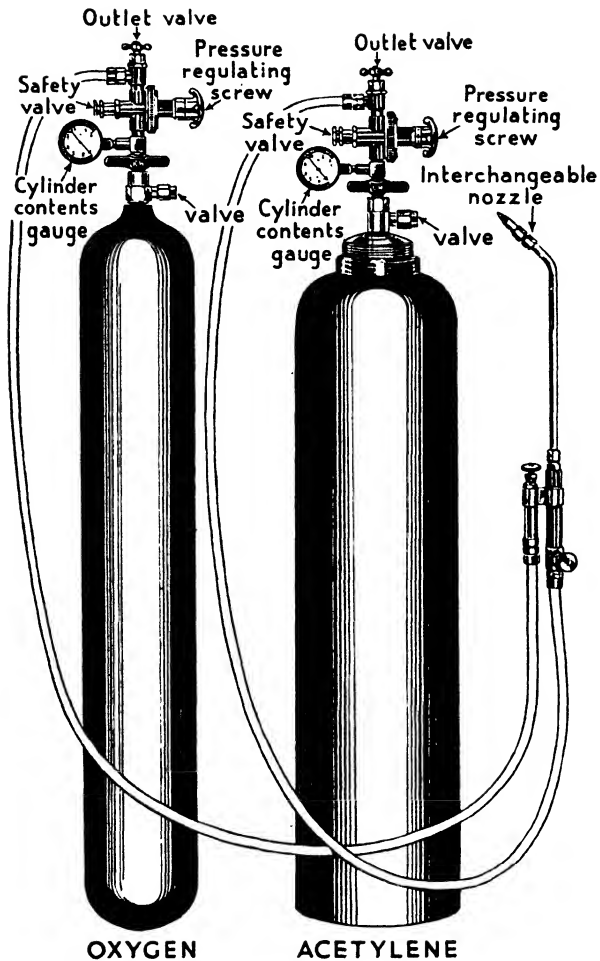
HIGH-PRESSURE OXY-ACETYLENE WELDING EQUIPMENT
